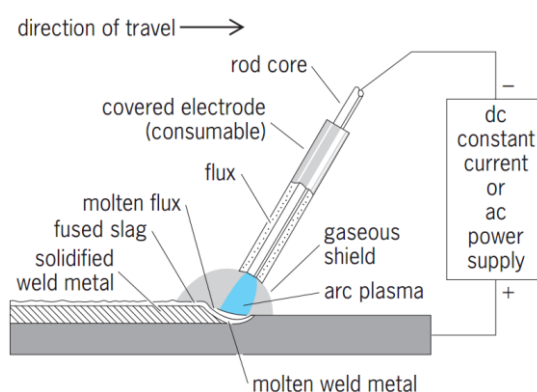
SMAW Process (Shielded metal-arc welding, 2011)
